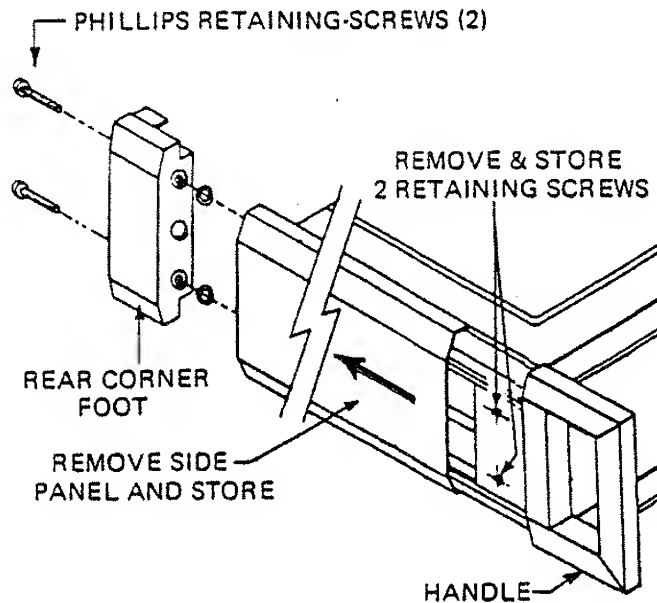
Rear Corner Foot, Side Panel, and Handle Detail
